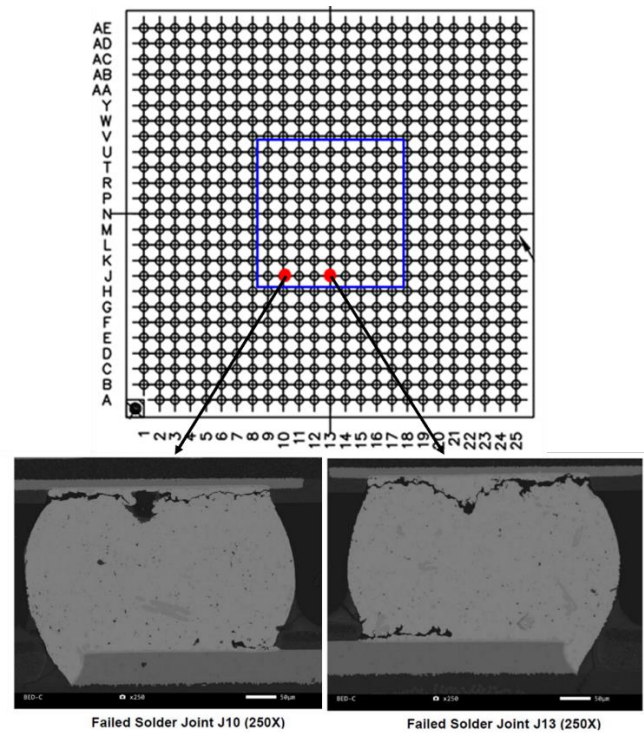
BL-TC first failure location, bump cross section for 21x21mm² lidded package. Location is corner row bumps at the die edge. Failure mode is bulk solder cracking at package side.
